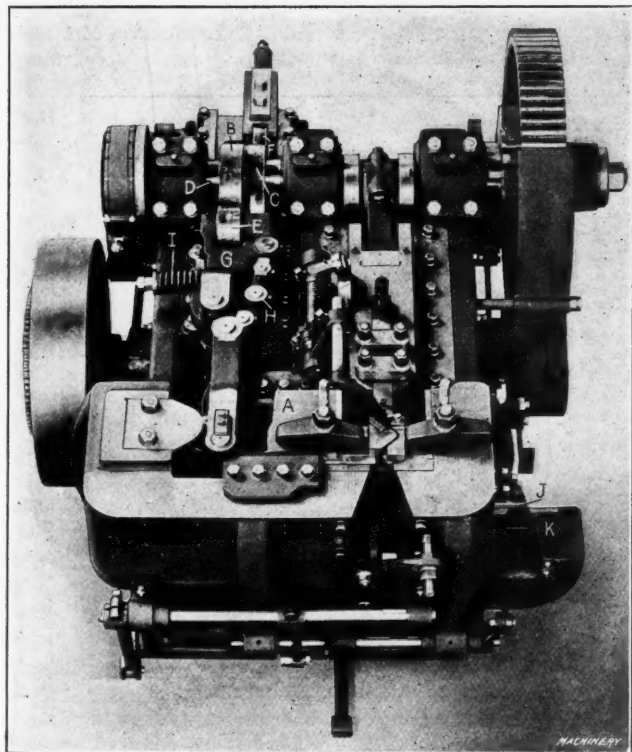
"National" Upsetting and Forging Machine having a Safety Relief Mechanism for operating the Gripping Dies
